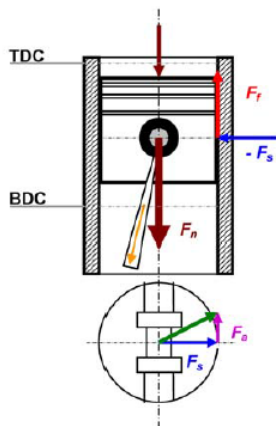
FORCE SURFACES OF PISTON ASSEMBLY
